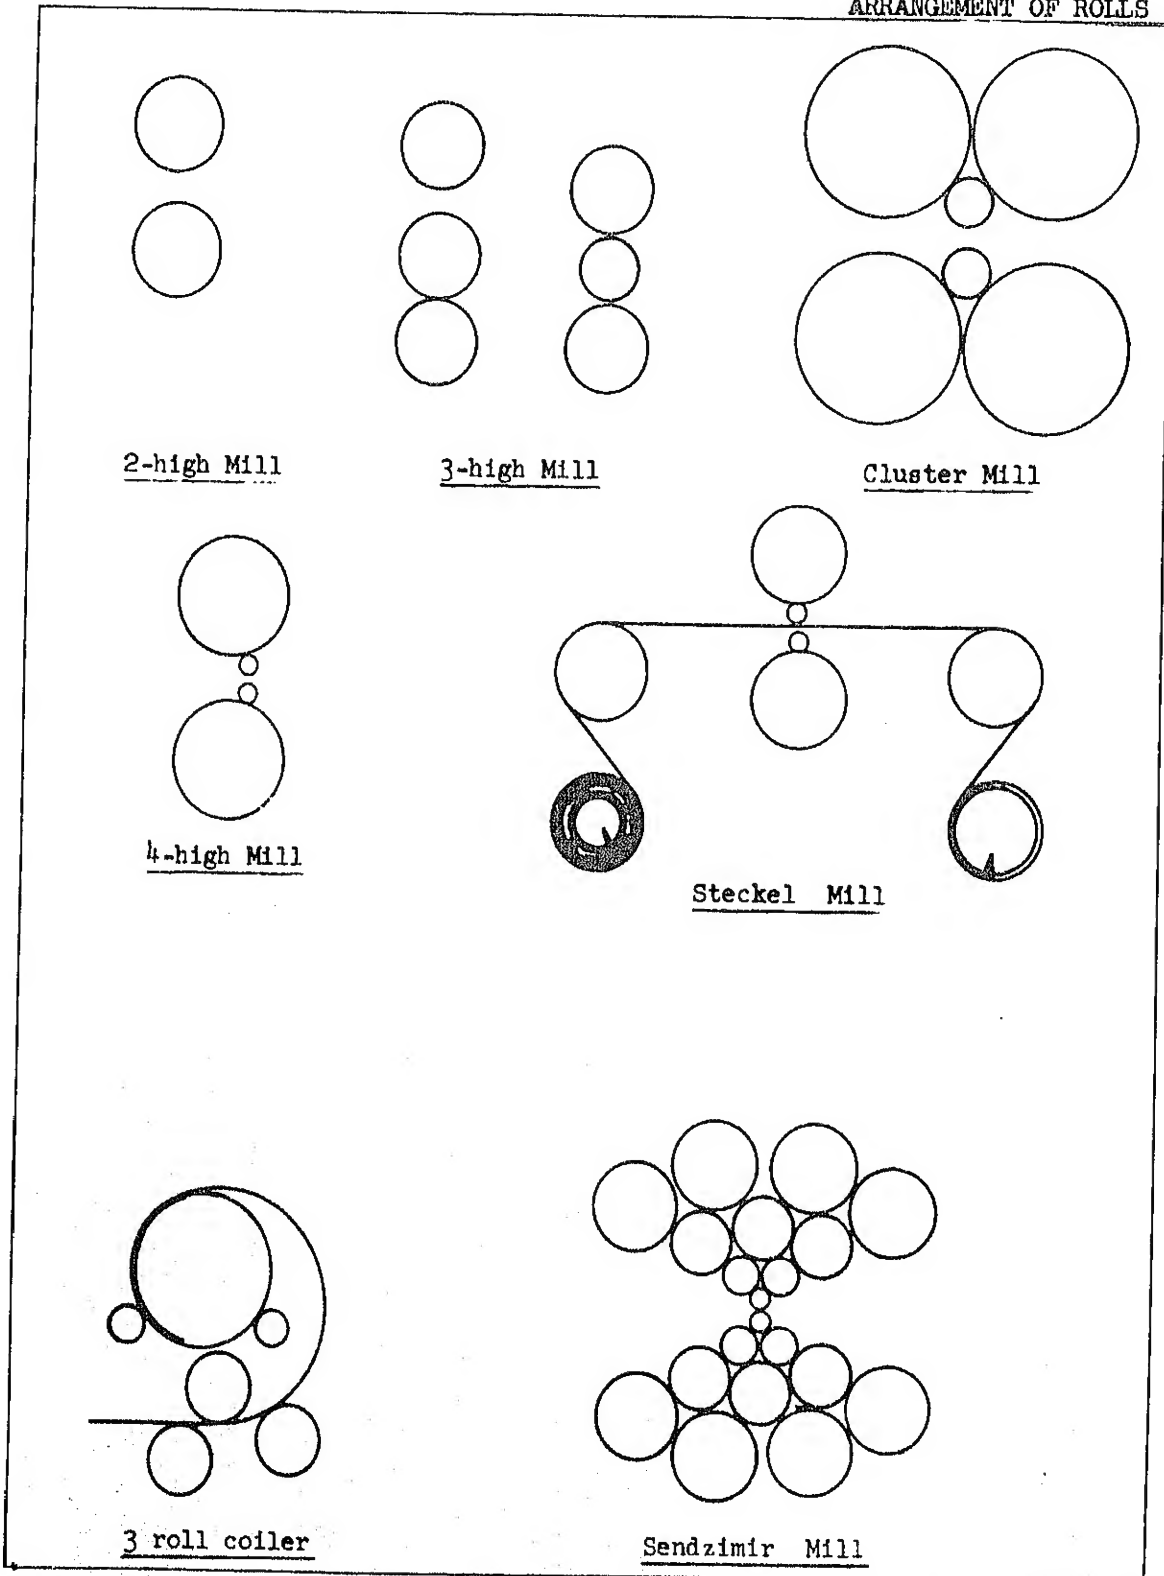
Arrangement of rolls in 2-high, 3-high, 4-high mills Cluster mills, Steckel mills, 3-roll coiler, and Sendzimir mill
